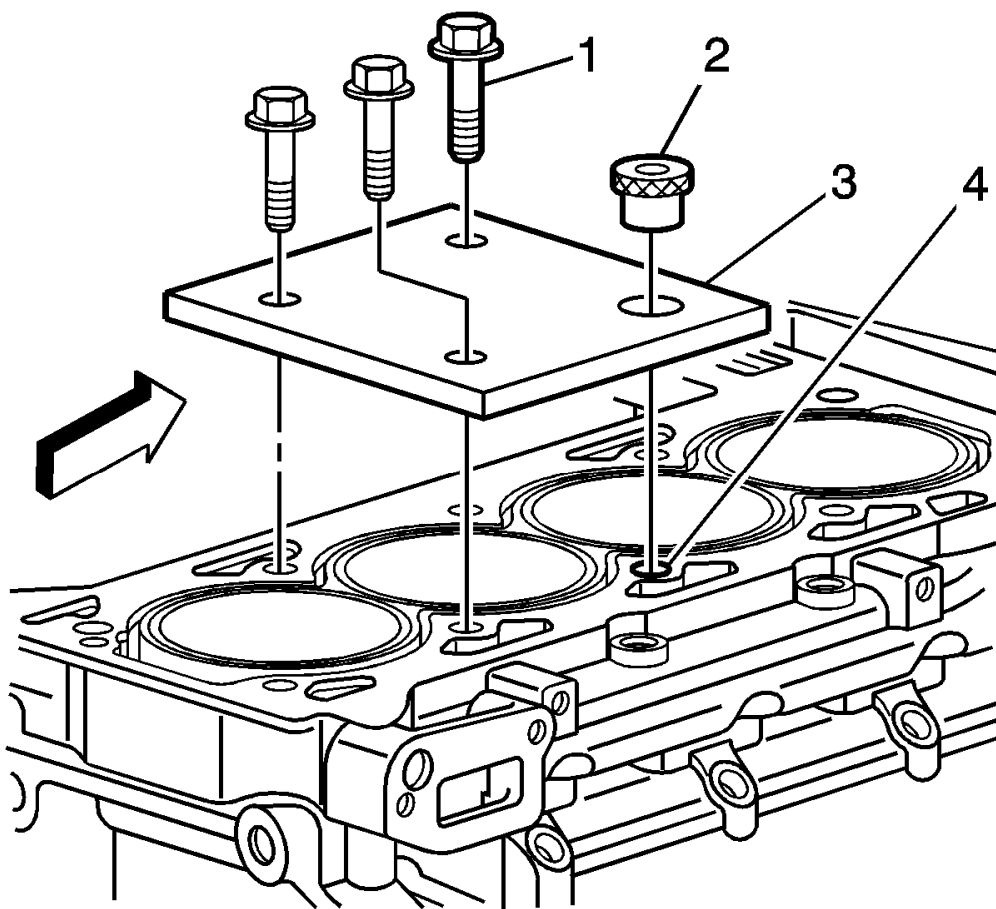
Installing Fixture Plate, Bolts, & Bushing
